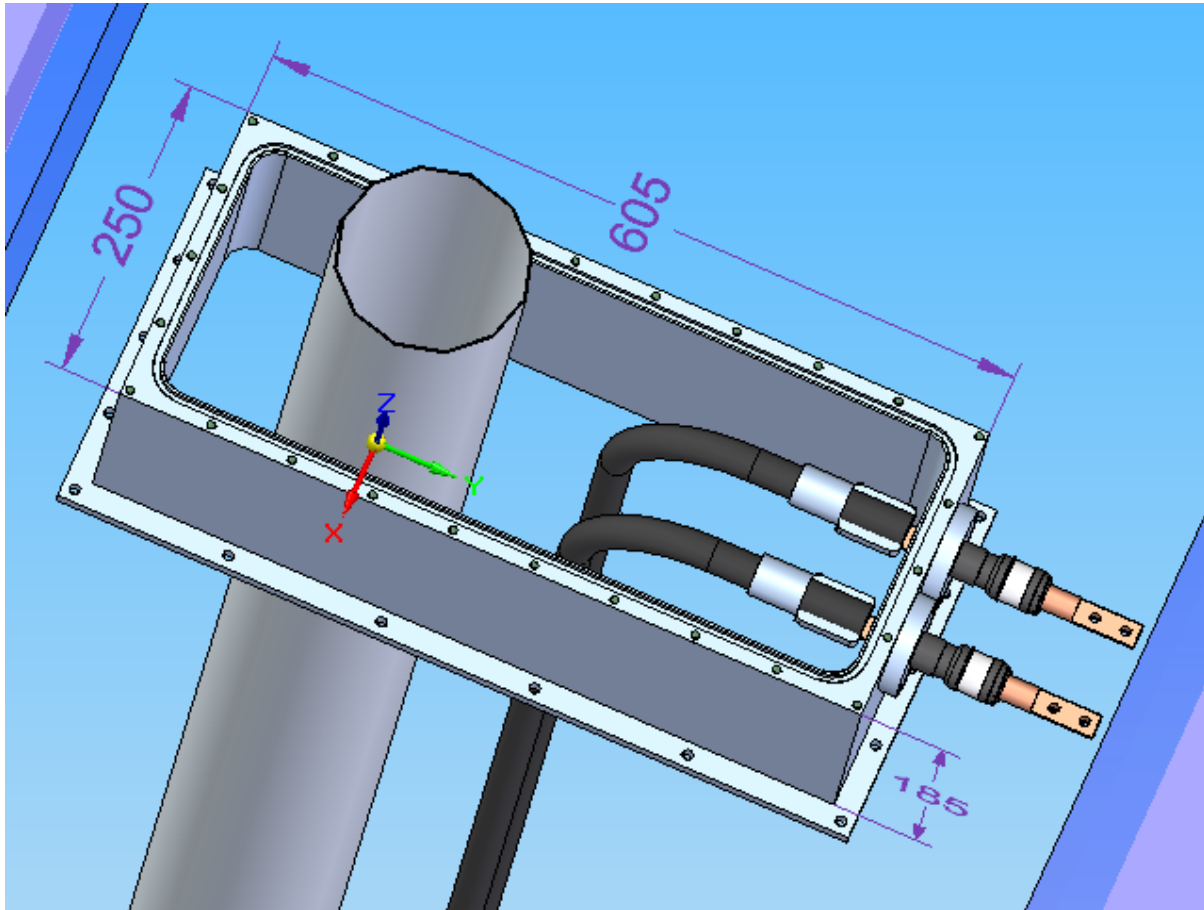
Hood above helium container with gas cooling supply and coil power connections (sensor wiring not shown, will be parallel to coil power cables)
